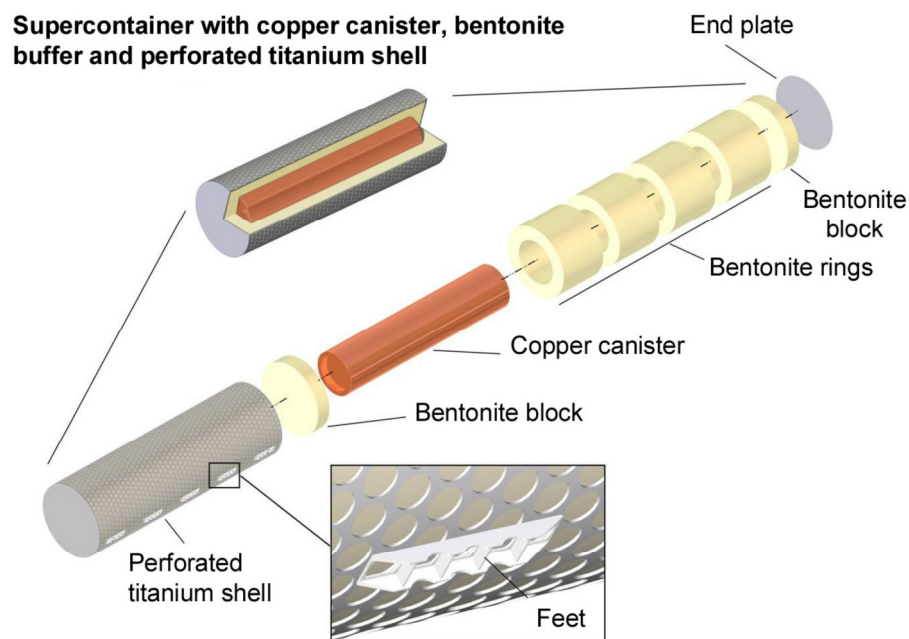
The buffer and canister are embedded in a perforated shell (with solid end plates) forming a Supercontainer in the KBS-3H design.
